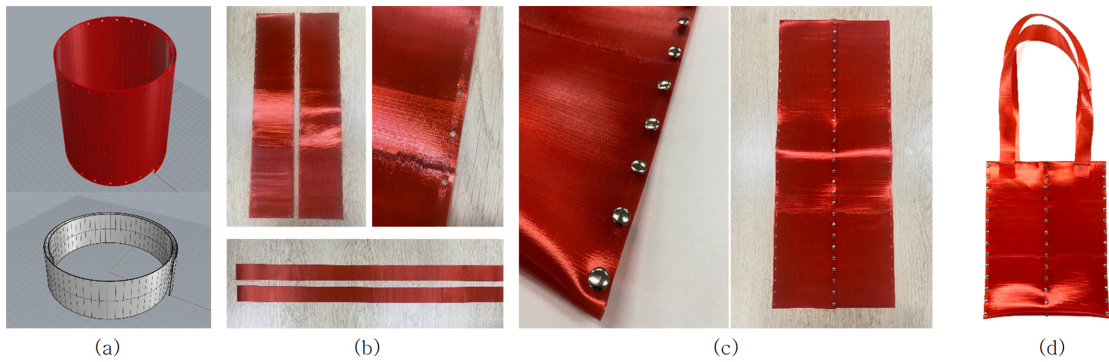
The production process of <Design 2>; (a) 3D modeling, (b) printed patterns, (c) making process, (d) the finished prototype.
